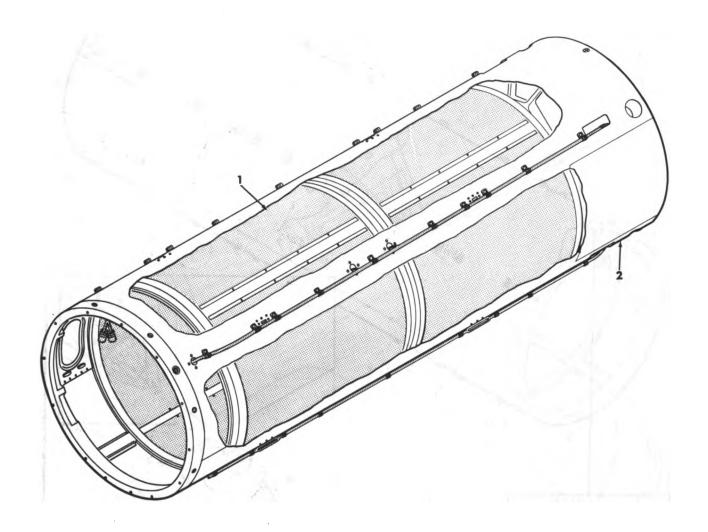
EQUIPMENT INSTALLATION. ENGINE SECTION /9020467/
